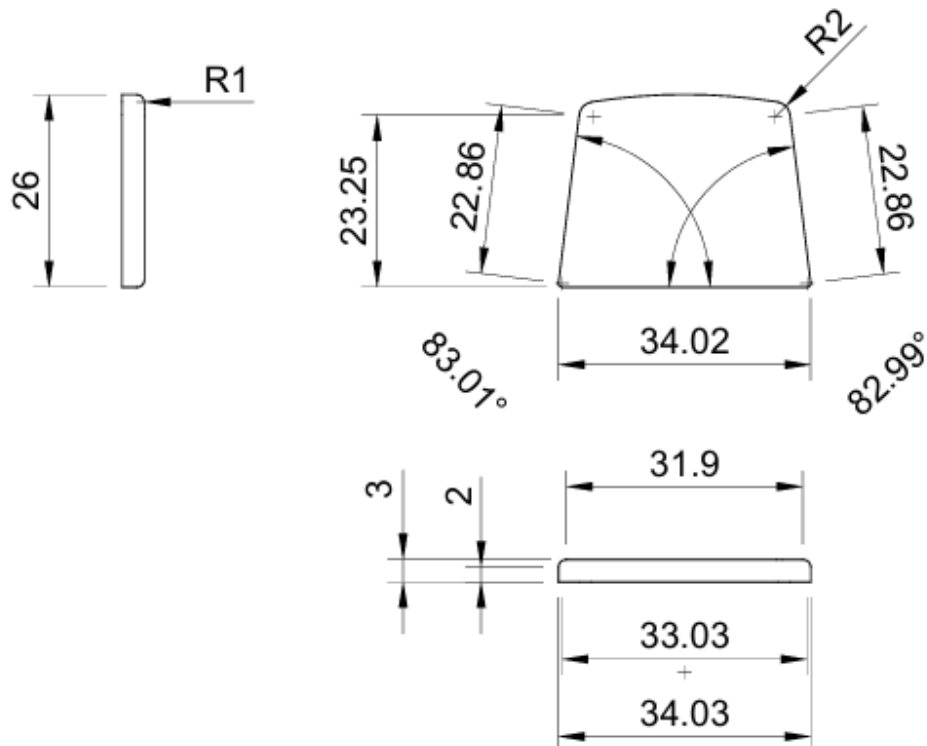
Front Lower Reflector CAD Drawing and Dimensions Part 6
